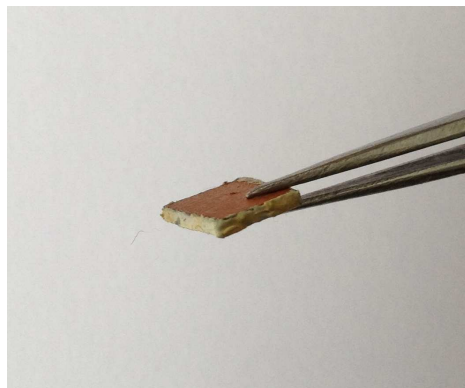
Pellets of granulated feedstock based on copper powders ready for use in the injection moulding machine.
